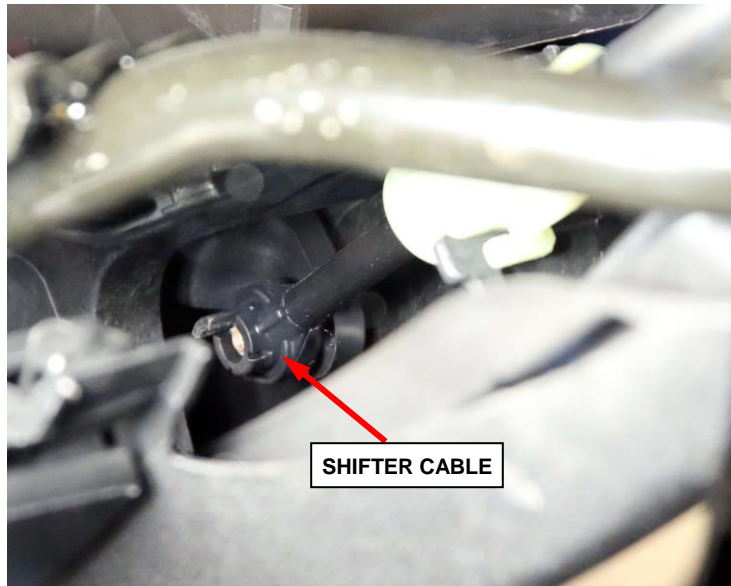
Install Shifter Cable Assembly to Shifter Housing
